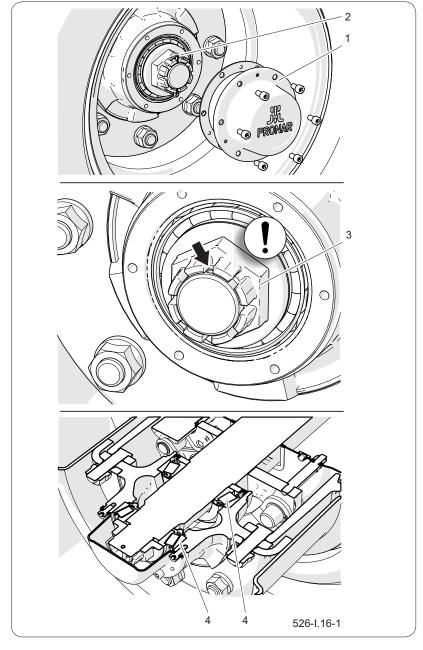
The principle of bearing clearance adjustment (1) hub cover, (2) cotter pin, (3) nut, (4) tapered roller bearing
